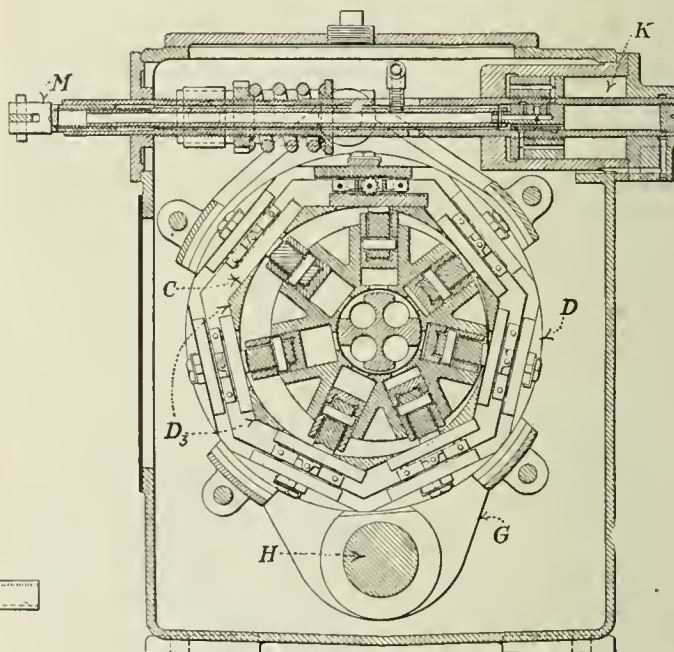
TRANSVERSE SECTION THROUGH CENTER OF PUMP
